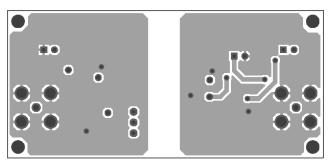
HCPL-4562 / HCNW4562 Evaluation Kit PCB Bottom Overlay
